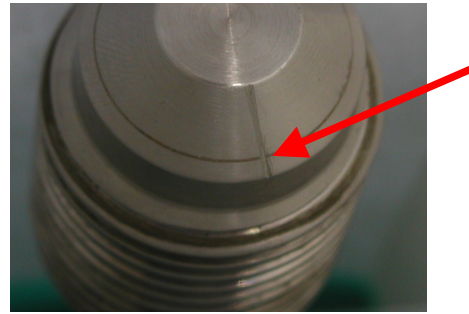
Artificial Scratch on 1-inch Cylinder Valve Stem
